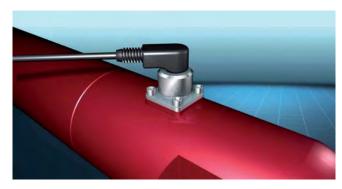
Four standard screws must be tightened to mount the connector flange on the cylinder.
